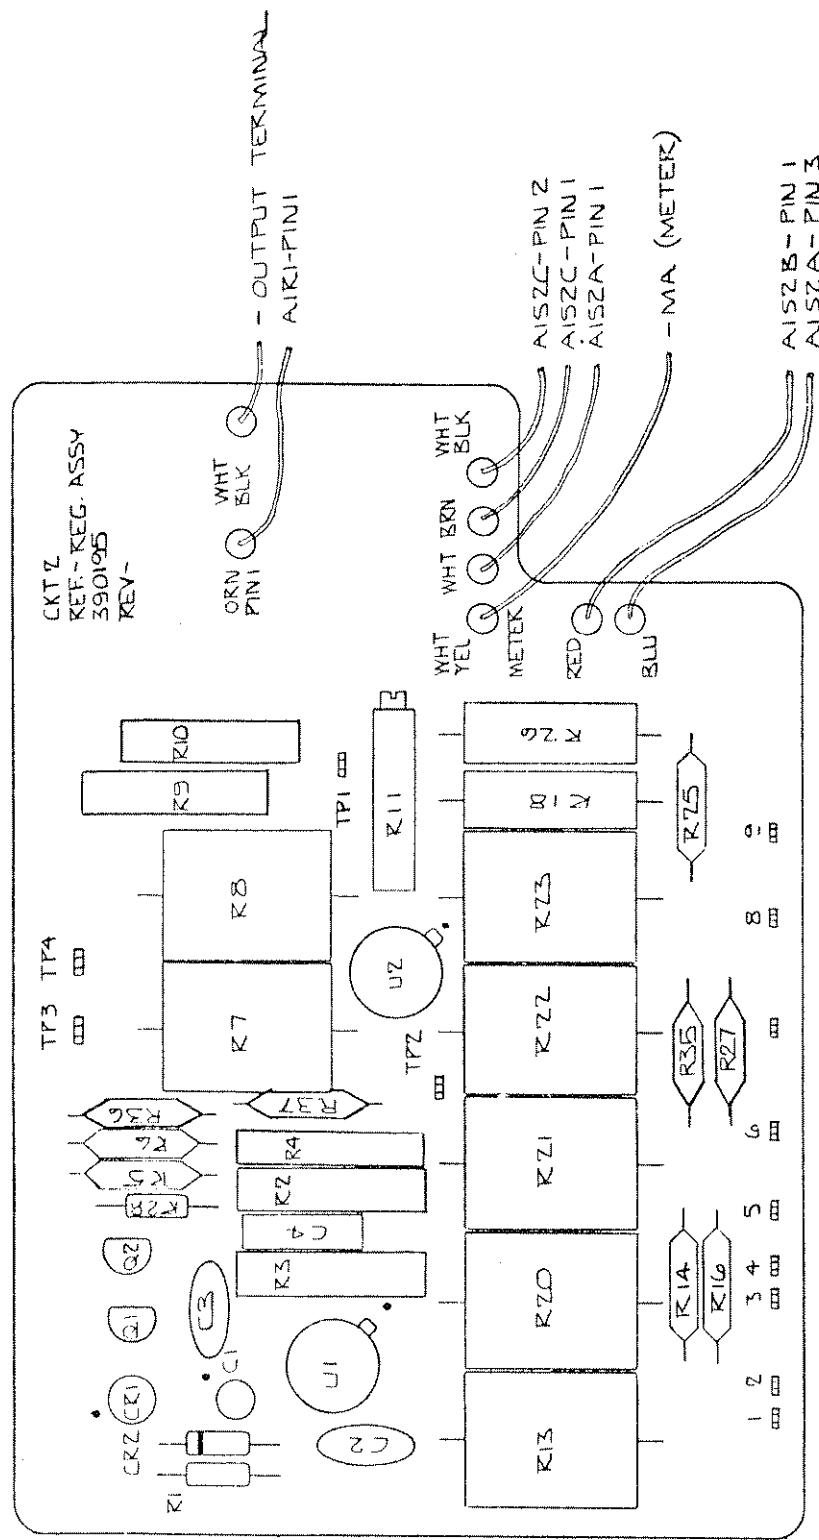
REFERENCE - REGULATOR PCB ASSEMBLY.
